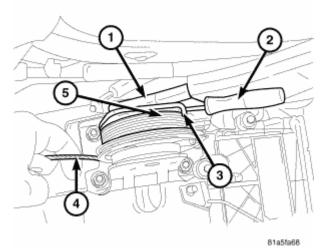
Parking Brake Lock Out Courtesy of CHRYSLER LLC
